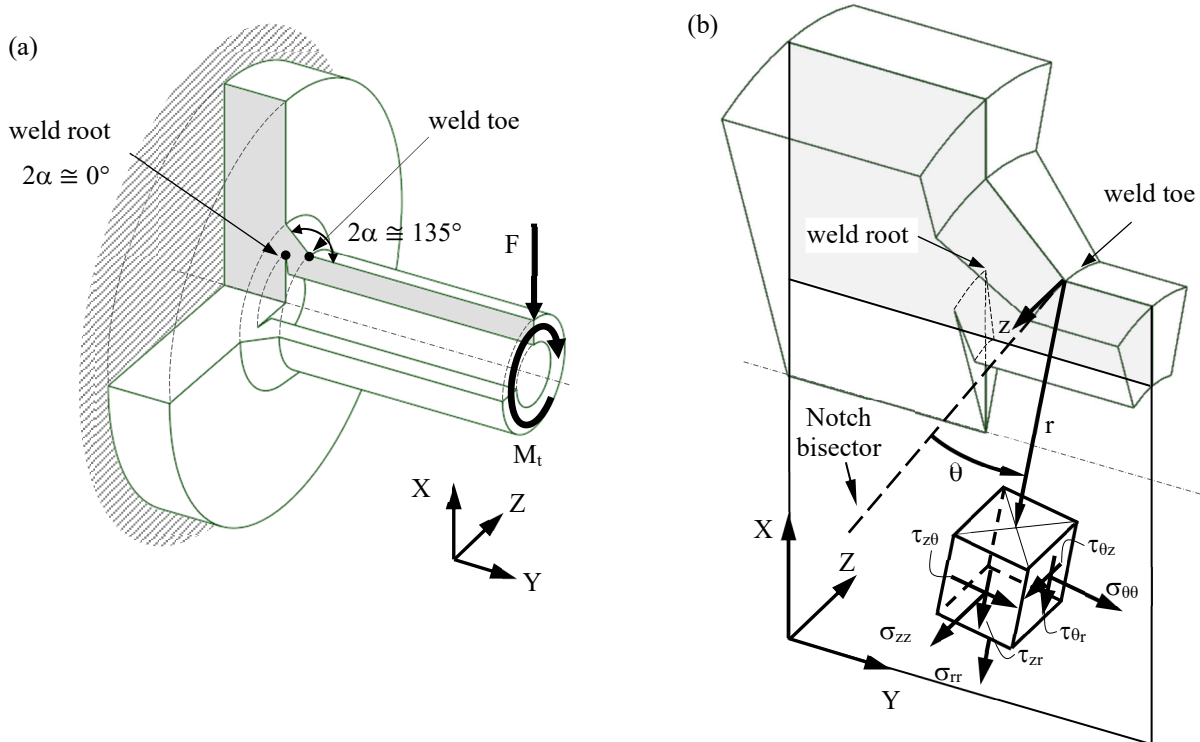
(a) Partial-penetration tube-to-flange welded joint under combined bending and torsion fatigue loading. The sharp V-notch opening angle 2α is typically 0° at the weld root and 135° at the weld toe. (b) Cylindrical reference system (r, θ, z) centred at the weld toe and singular stress components. See also Ref. ⁵⁴.
